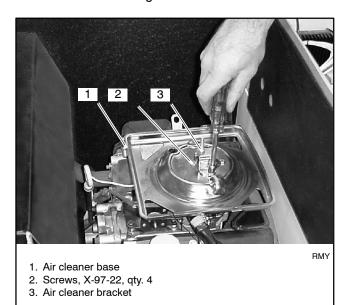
Air Cleaner Bracket and Screws (14RESA shown)
